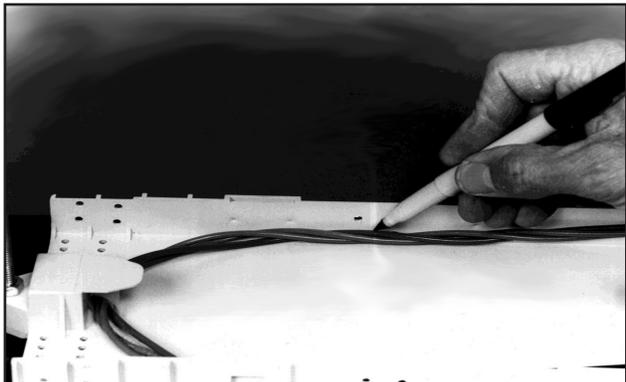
MARK THE FIBERS FOR BOTTOM CABLE ENTRY
